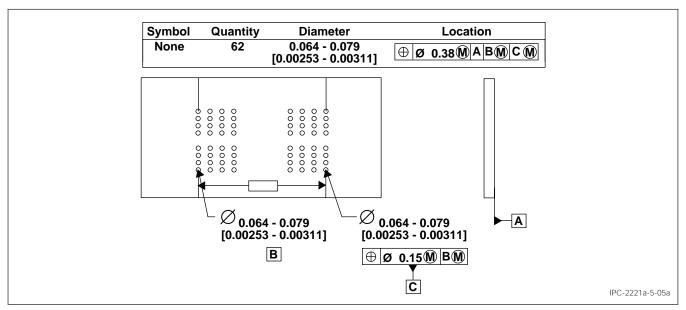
A Example of Location of a Pattern of Plated-Through Holes, mm [in]
